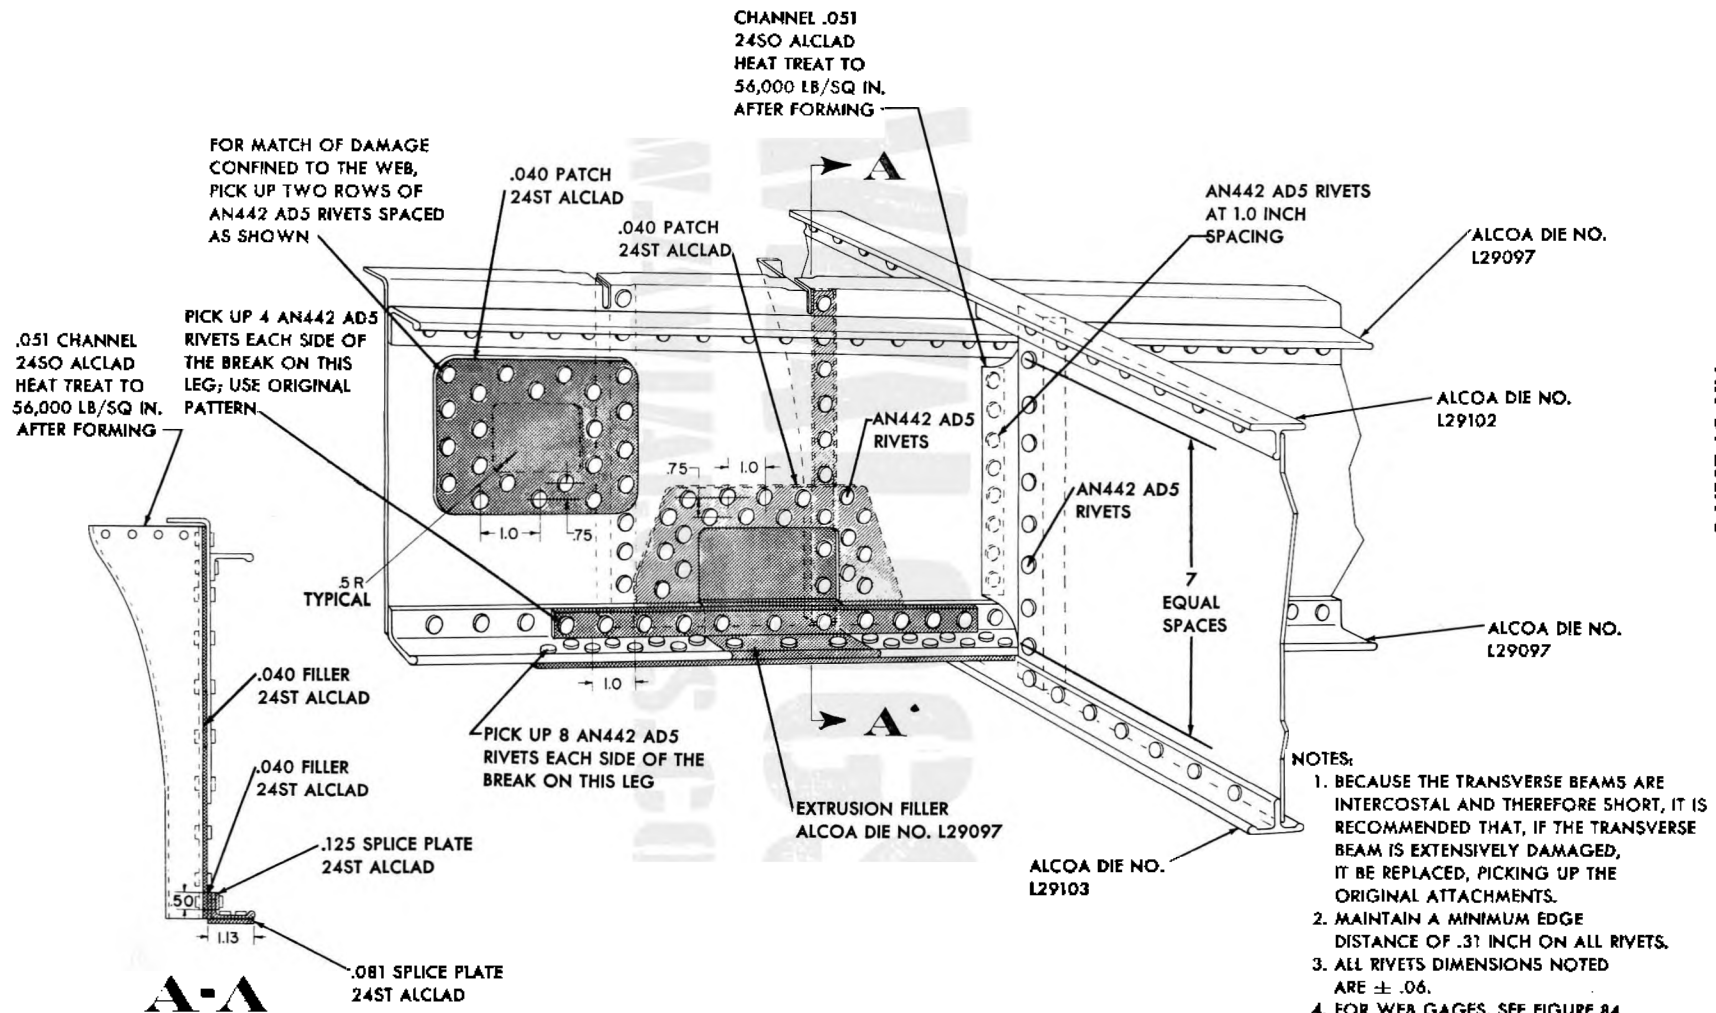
REPAIR TO LONGITUDINAL FLOOR BEAM
